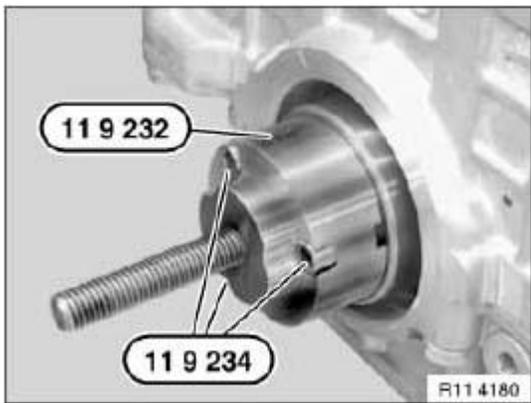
Mounting Special Tool 11 9 232 With Screws To Crankshaft
